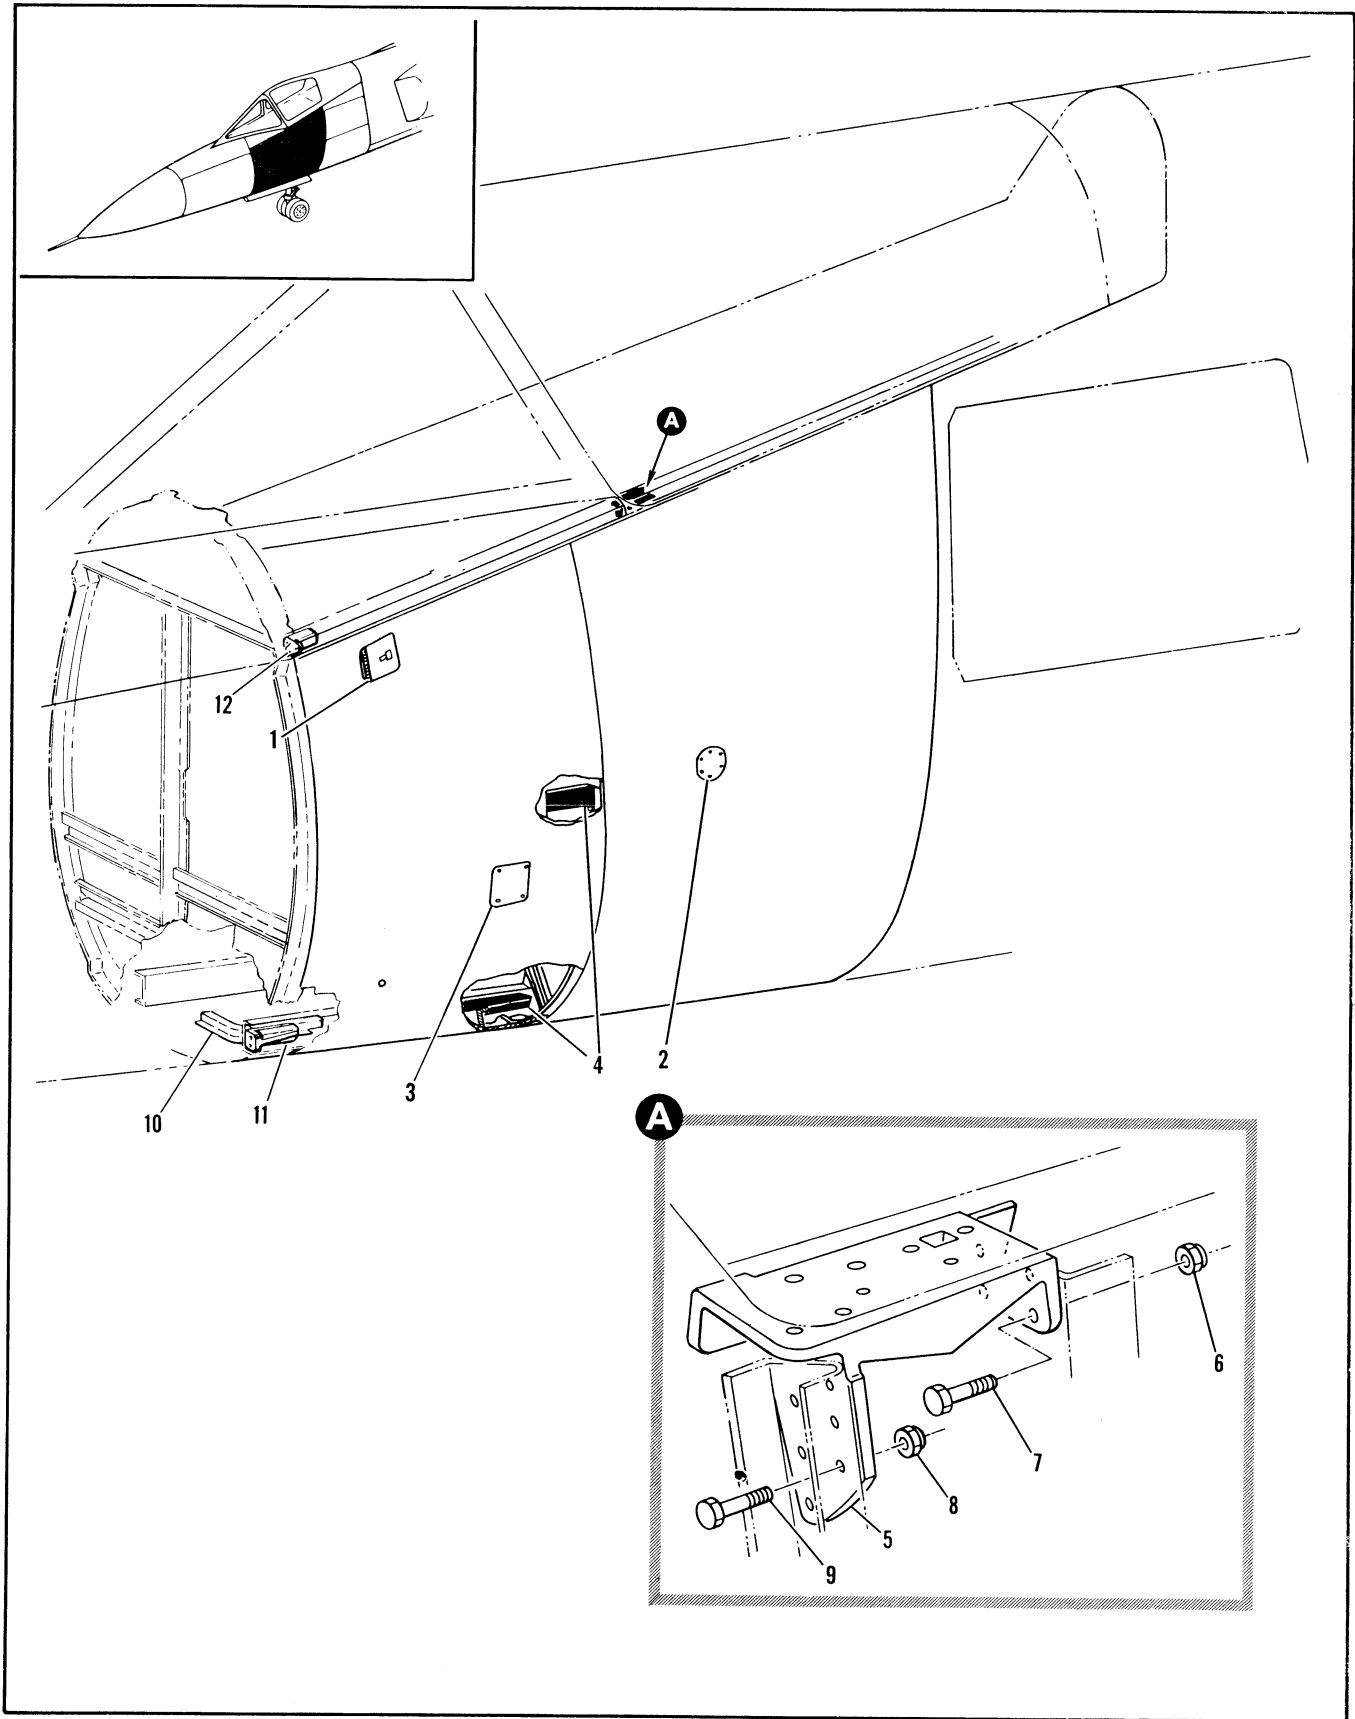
LH Panel Installation Sta 102 to 172
